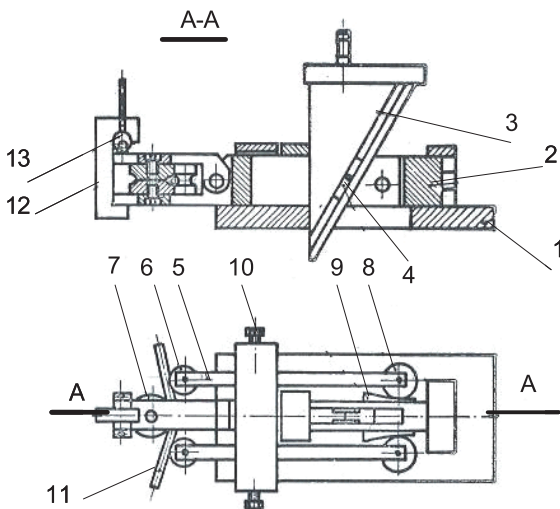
Schematic diagram of the tool. 1 – plate, 2 – slide, 3 – taper key, 4 – inserts, 5 – levers, 6 – bending rollers, 7 – die, 8 – rollers, 9 – cams, 10 – screws, 11 – tube, 12 – clamp, 13 – eccentric
